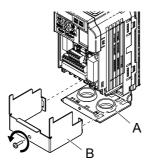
Remove the Terminal Cover on a NEMA Type 1 Drive
